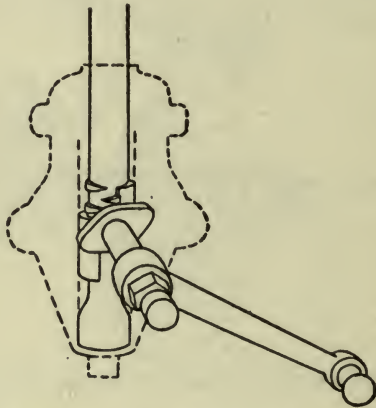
DOUBLE WHEEL SWIVELLED AXLE CONTROL
